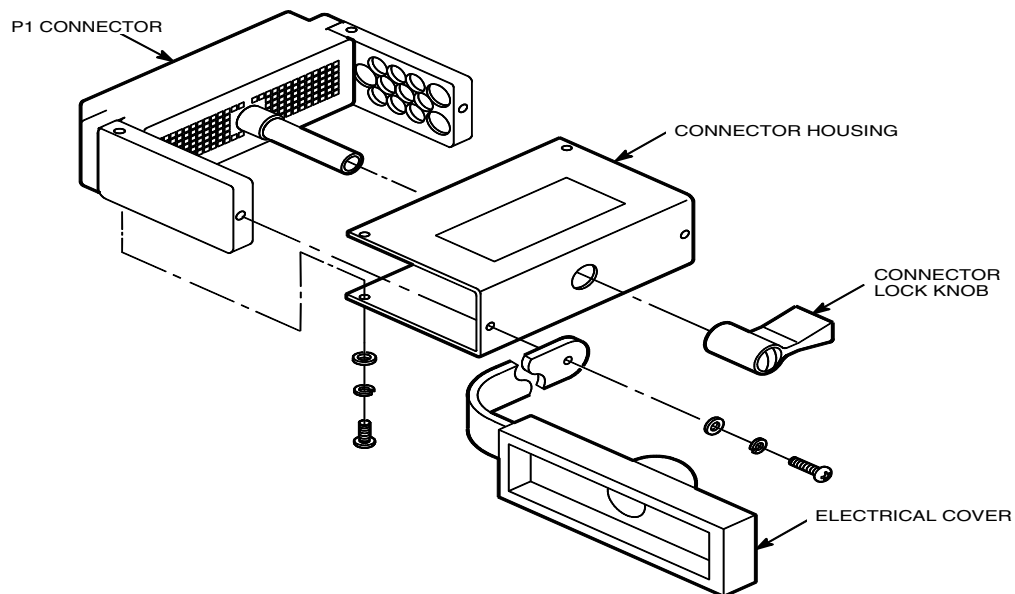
Disassembly/Assembly of W2P1 Connector Housing.
